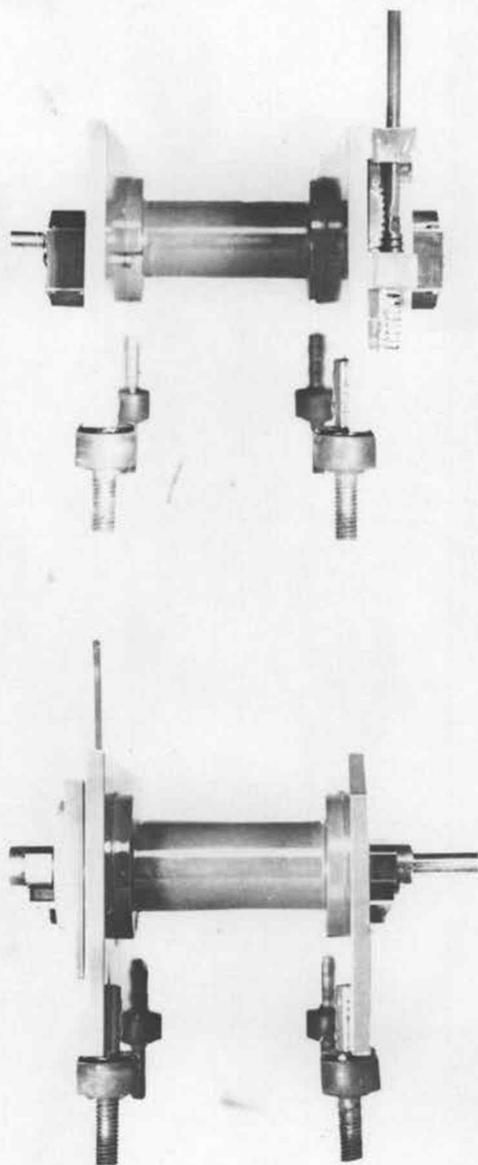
End views of the breaker unit showing the cam shaft housing, the mounting studs and shock absorbers, and the worm gear.
